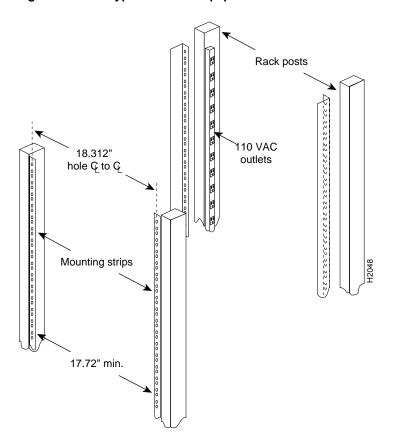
Typical 19-Inch Equipment Rack Posts and Mounting Strips
